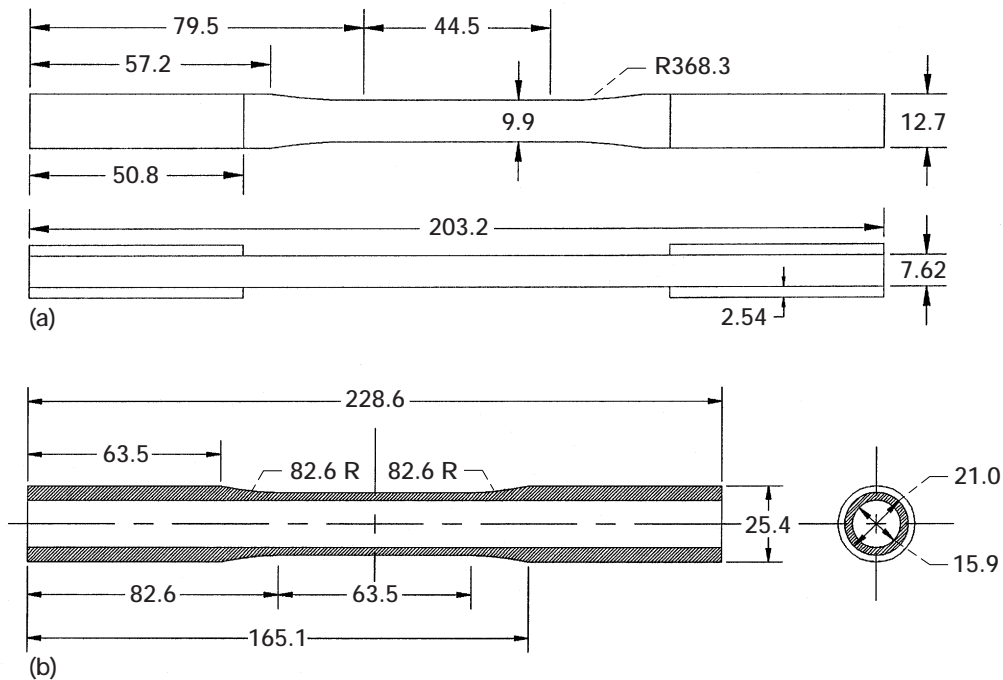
Typical specimen geometries. (All dimensions in mm.) (a) SiC/Ti-15-3 thick plate. (b) Inconel 718 tube.
